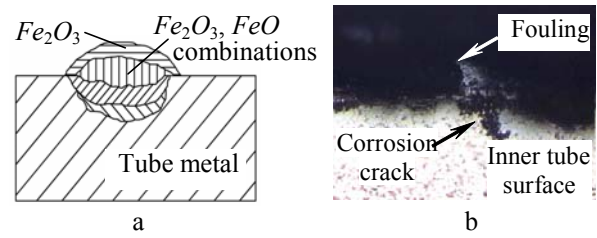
Cross-section of heat exchanger tube: a – schematic cross-section of a HE tube; b – transverse section of a tube with inner crater on the surface
